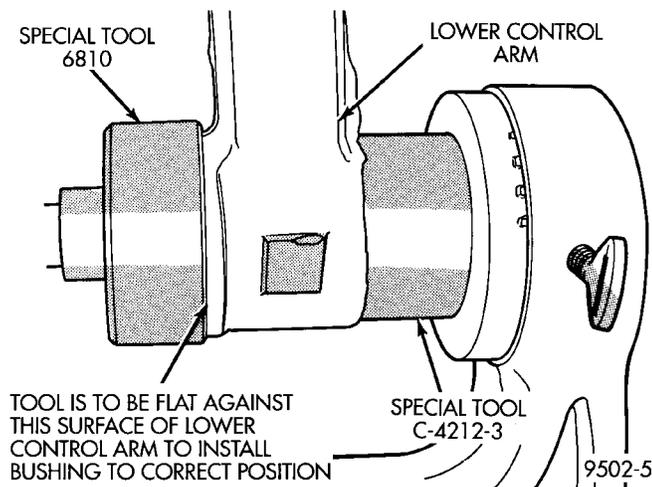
Installation Position Of Front Lower Control Arm Bushing
